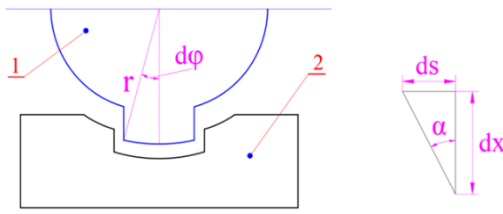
The link diagram between the bolt carrier and the bolt (1. The bolt; 2. The bolt carrier)
